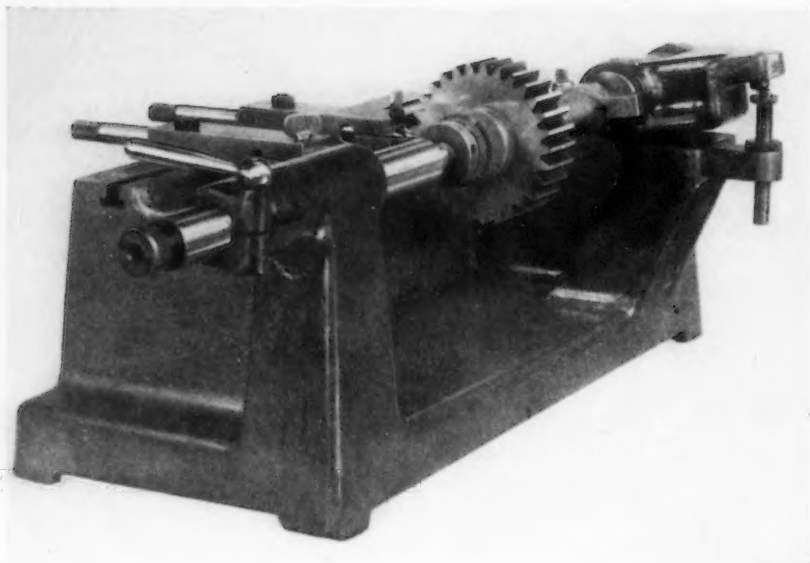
Work-locating fixture designed to assure mounting of the driving dog in proper relation to the tooth space.
